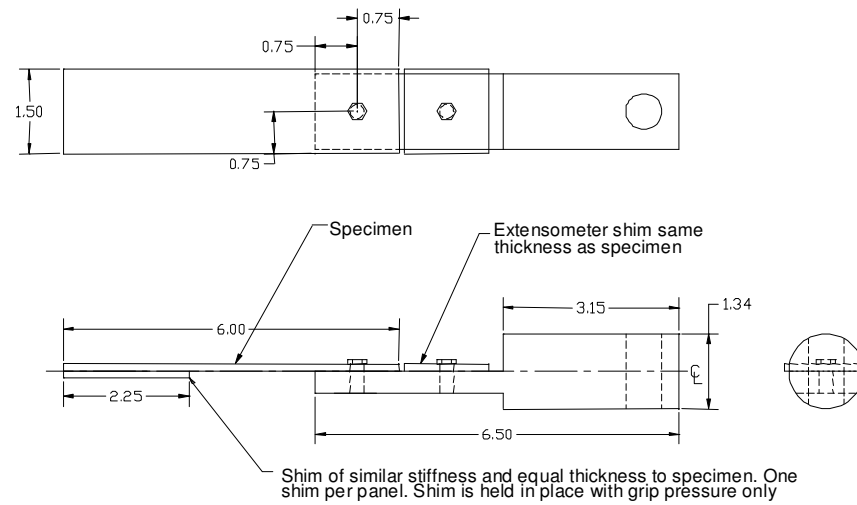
Modified ASTM D5961 (Single Shear Bearing) Specimen and Loading Arrangement
